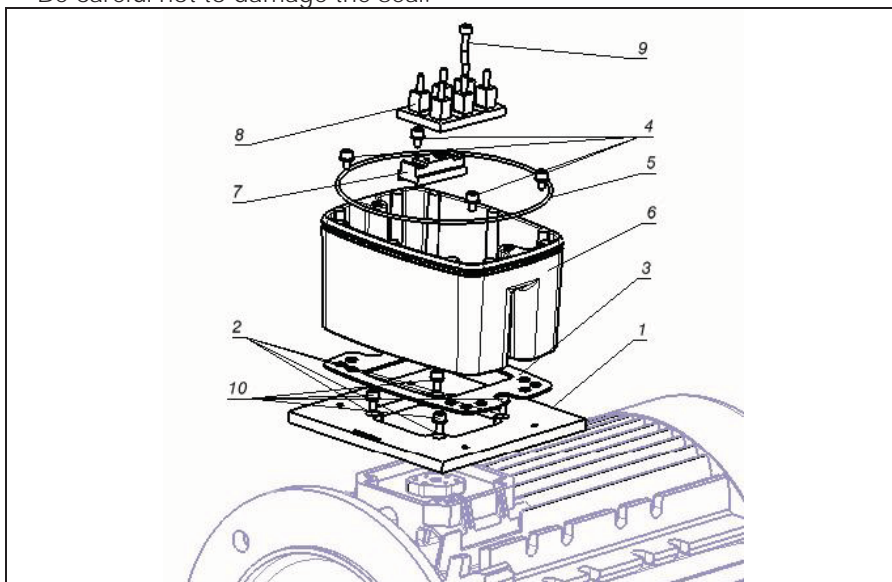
Assembly sequence: Connection box – adapter plate, size D
